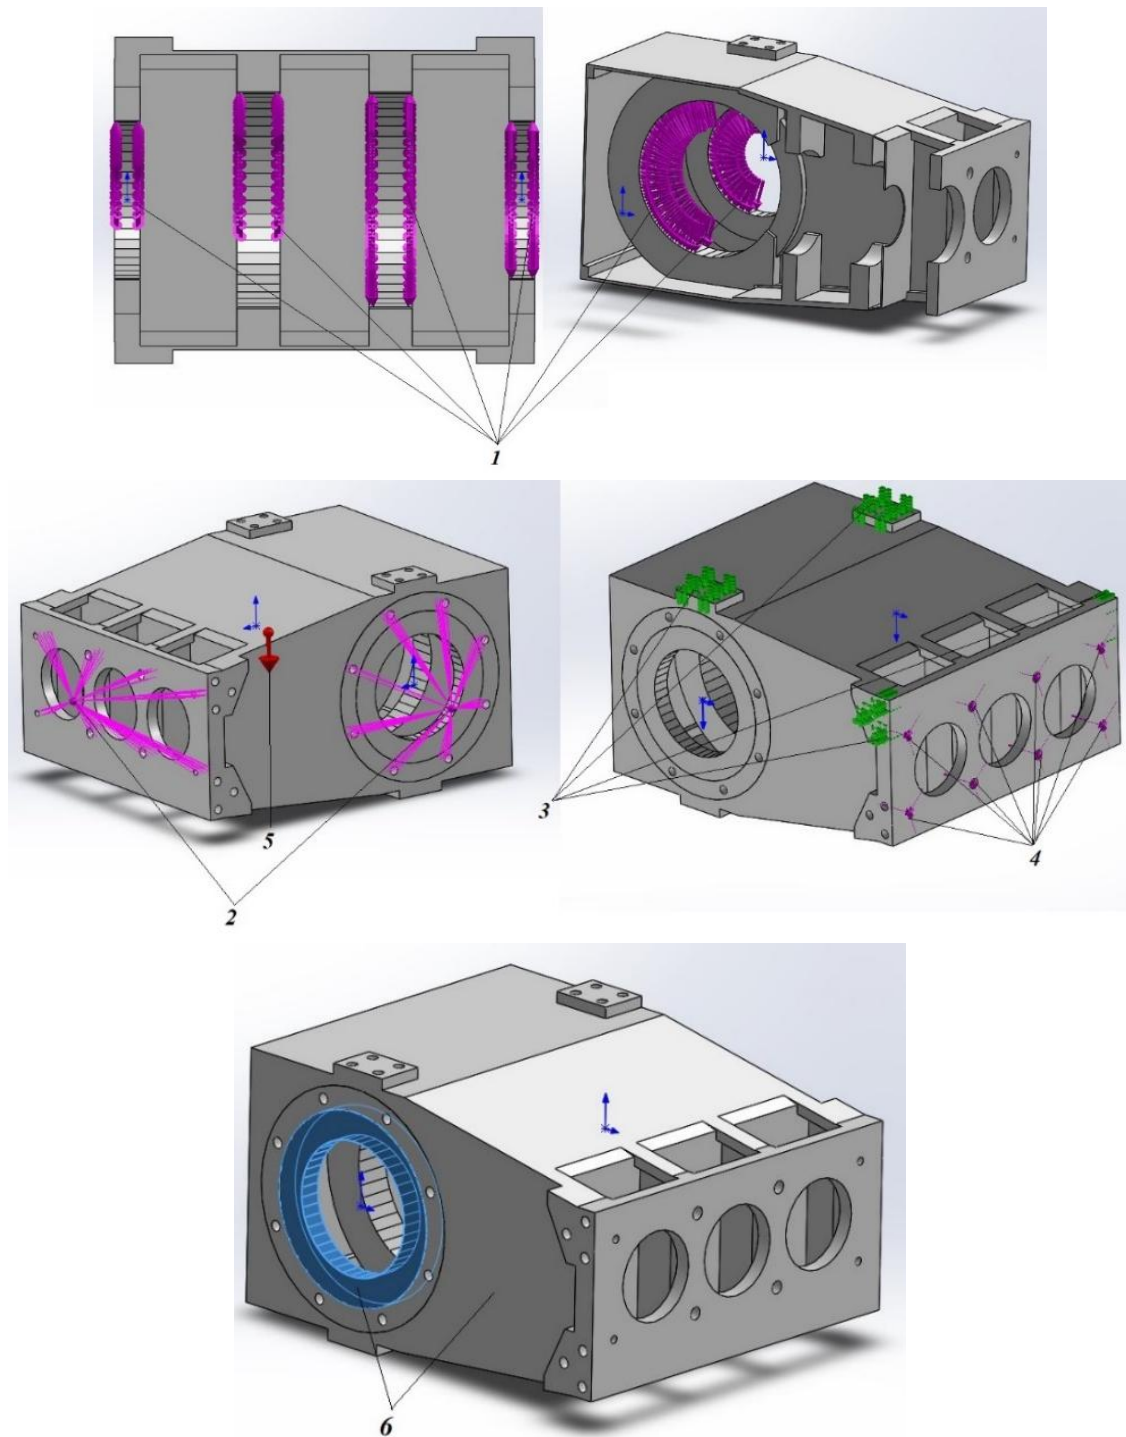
Boundary conditions: 1 — operating load (radial force distributed over cylindrical surfaces); 2 — remote loading (mass of the gearbox and hydraulic unit); 3 — restriction — “fixed”, zero movements in all axes — X , Y , Z ; 4 — operating load (pressure force of the liquid under discharge and suction); 5 — gravity; 6 — type of contact — connected (no gap) surfaces with shared nodes
